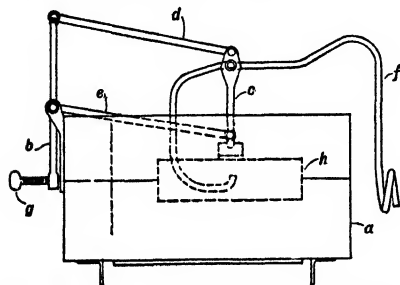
Adams siphon feeder (After Mine & Smelter Supply Co.).
